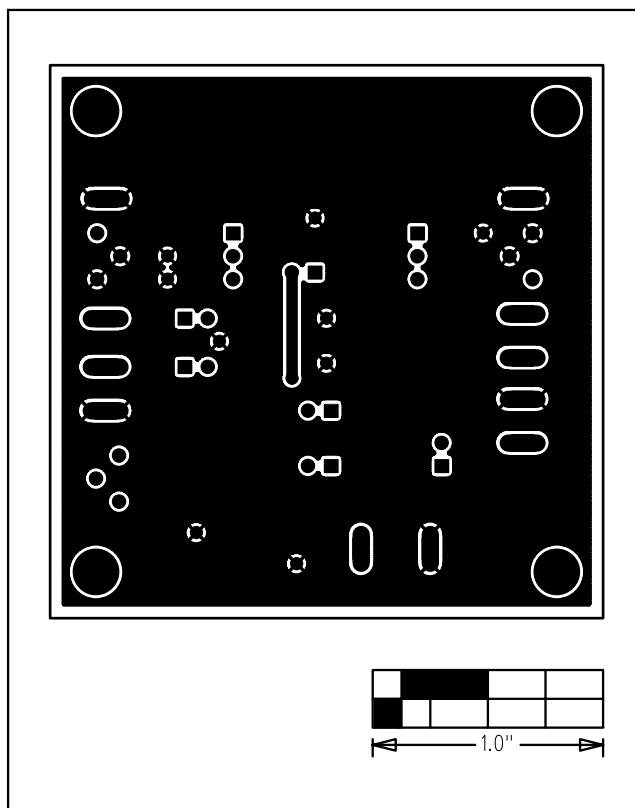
MAX4990 EV Kit PCB Layout—Solder Side
